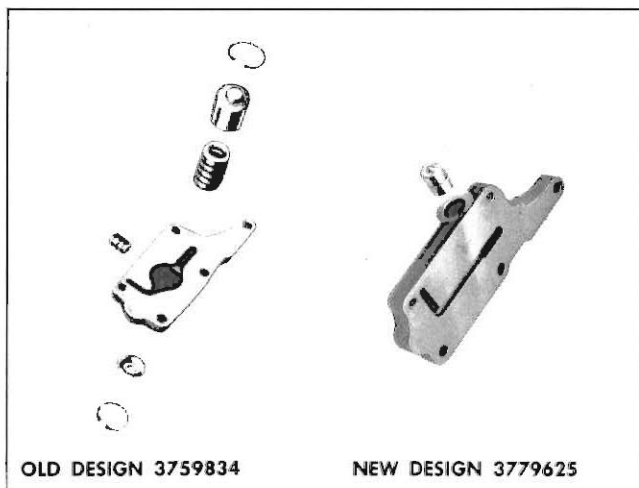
Old and New Design Hydraulic Modulators—Turboglide
